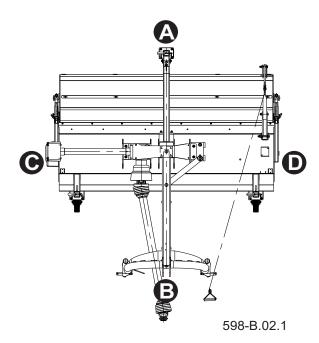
Directions used with reference to the machine - sweeper hitched to the front of the carrier vehicle
